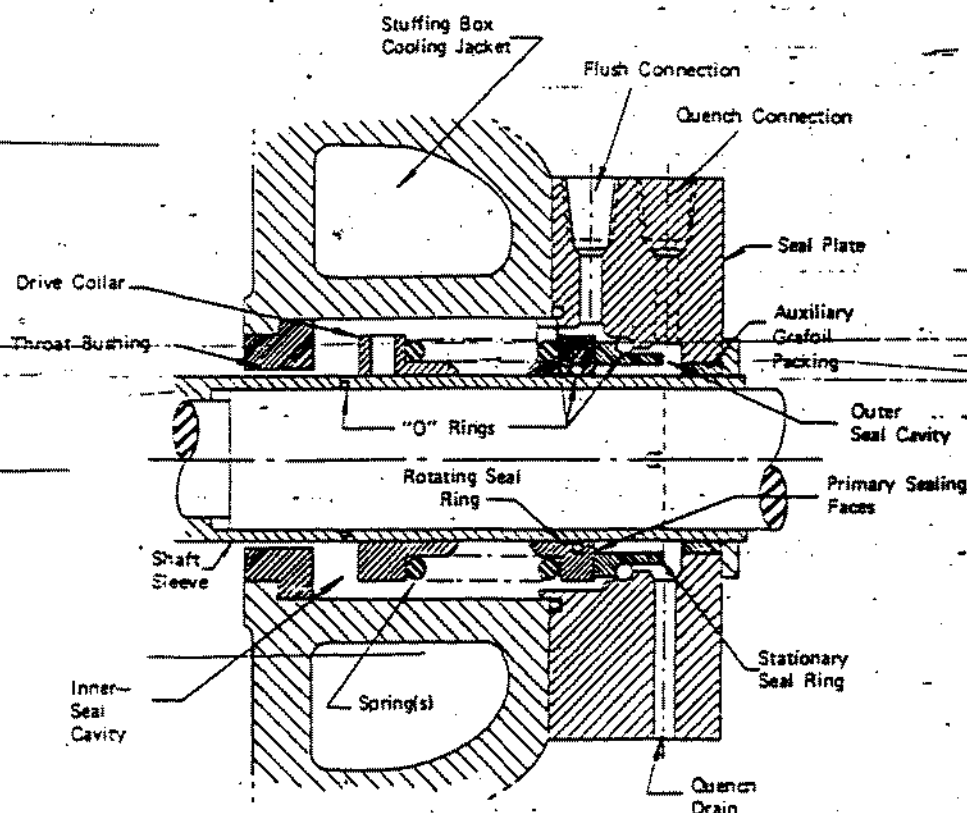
Centrifugal pump single mechanical seal with auxiliary Grafoil packing.
